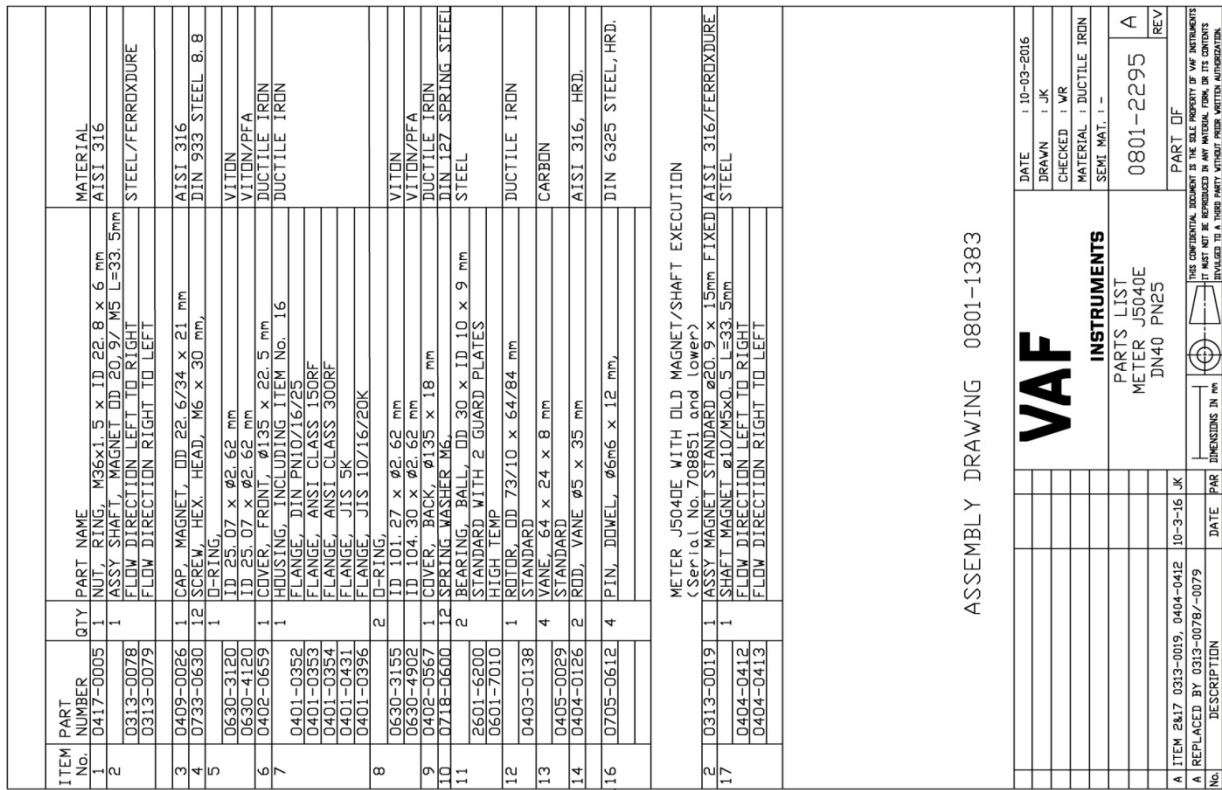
Drawing 0801-2295 – Partslist J5040E DN40 PN25
